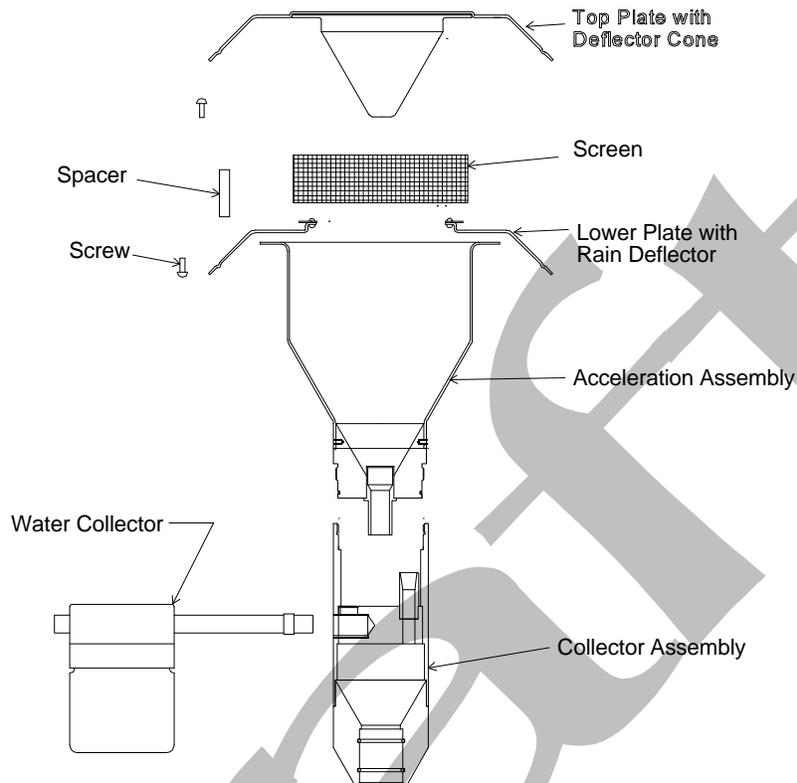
Exploded view of a PM₁₀ sampler inlet head.
